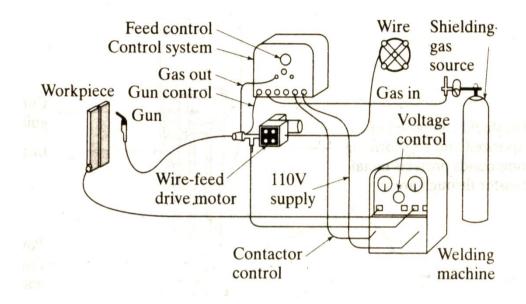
Basic Equipments Used In Gas Metal Arc Welding Operations
